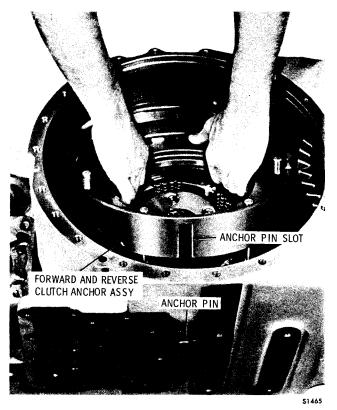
Installing forward and reverse clutch anchor assembly
